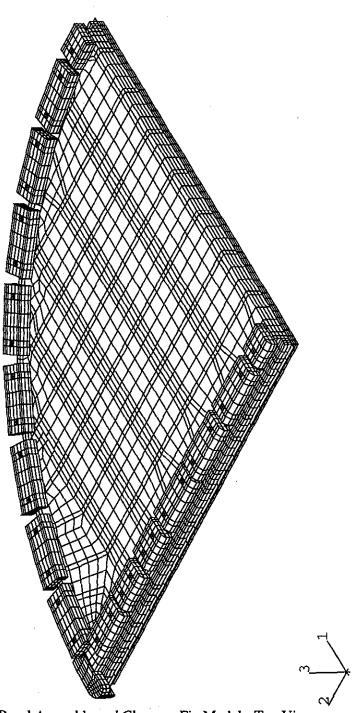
Plot - Panel Assembly and Clamps - Fix Model - Top View
